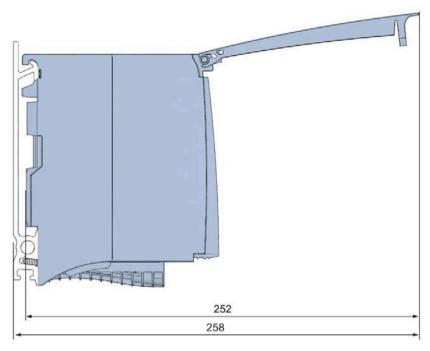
Dimensional drawing of the PS 25W 24VDC module from side with open front cover
